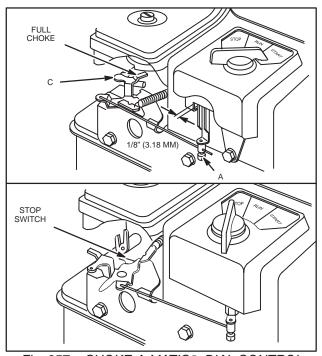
CHOKE-A-MATIC® DIAL CONTROL ADJUSTMENTS
